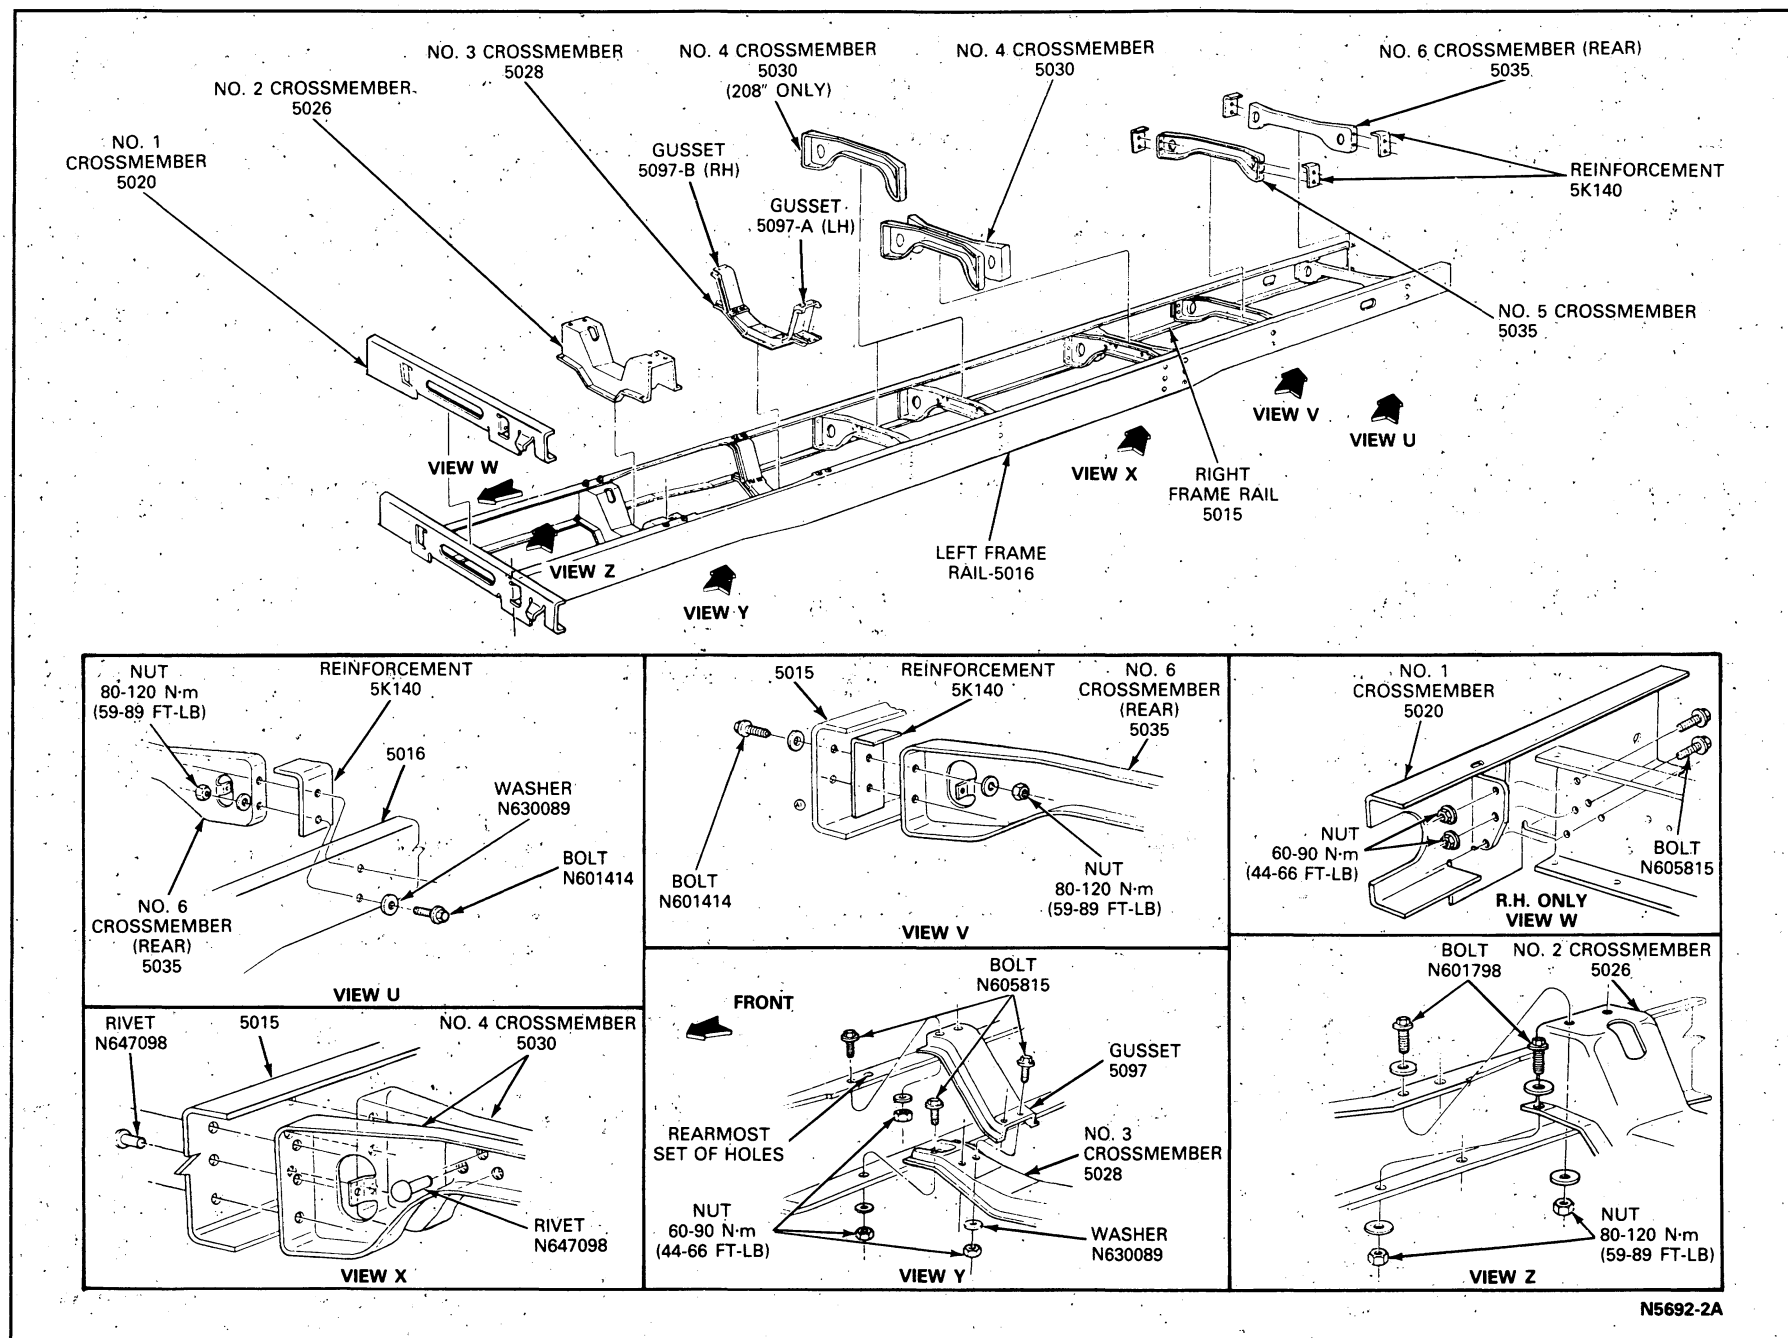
Frame and Crossmember Installation—F-Super Duty Motor Home Chassis (178 and 208 inch)
